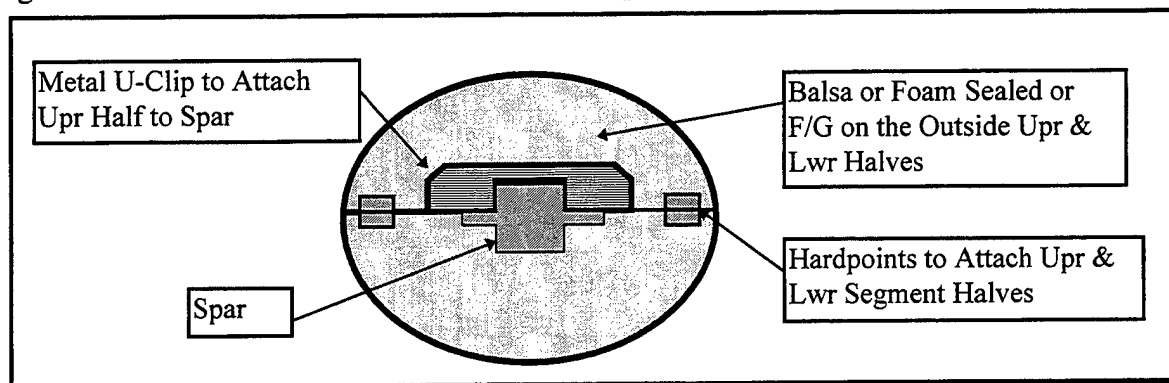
Fore/Aft View of Typical Segmented Construction
